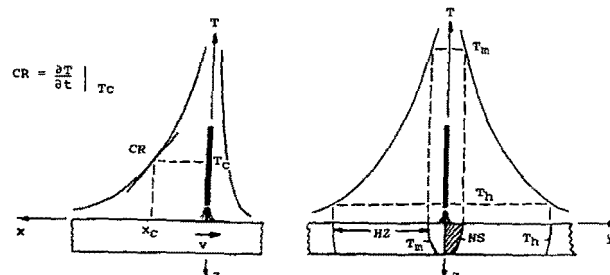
Definition of the welding outputs NS, HZ, CR
